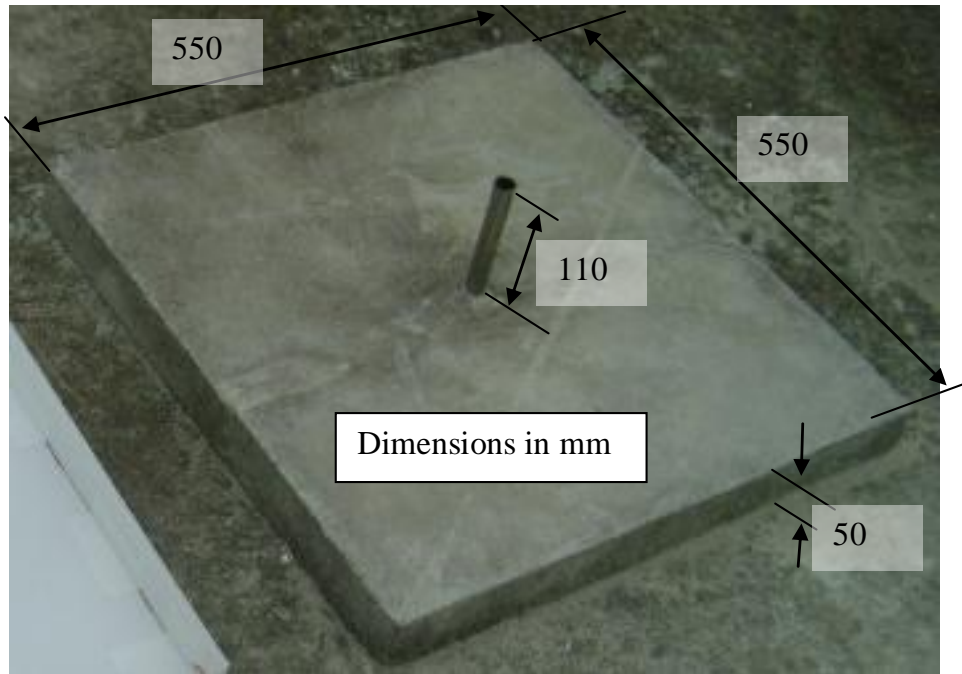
Dimensions of the basement piece. The shown tube is the axis of the systema and is illustrated in fig 5b. The nominal size of the tube is 1/4" (8 mm), outside diameter is 13.7 mm and inside diameter (standard size) is 9.2 mm. The tube is centered with help of tube wedged to the mold shown in fig 5a.
